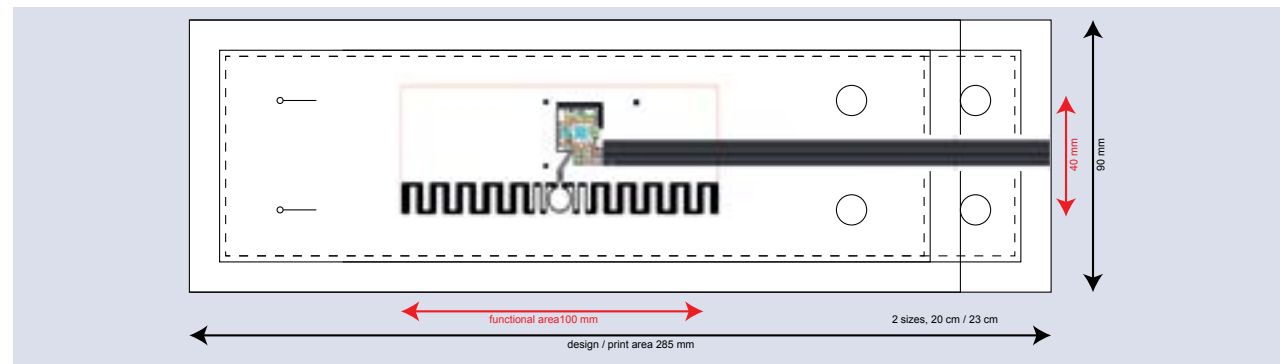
Technical drawing of the cuff with all the hybrid printed sensor, actuator and power technology.
